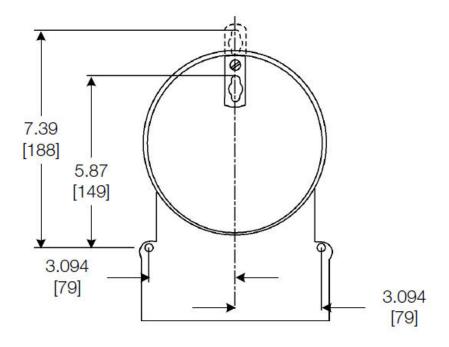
3. A-base Meter Type and Dimensions in Inches (millimeters) - Back View
